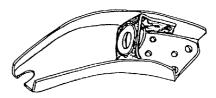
Rafter connection support; fracture originates from the welded zone if hsla is used with reduced thickness of both parts.
